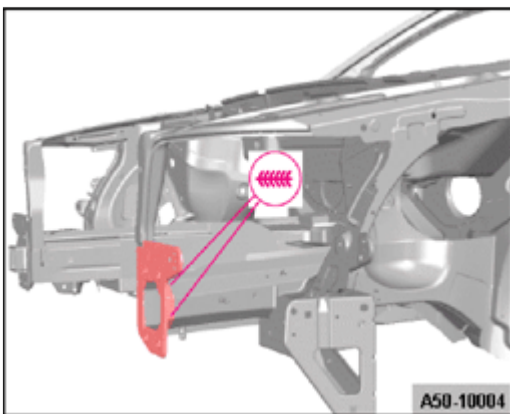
Welding In Impact Absorber Plate, Straight-Line Spot Weld Seam
